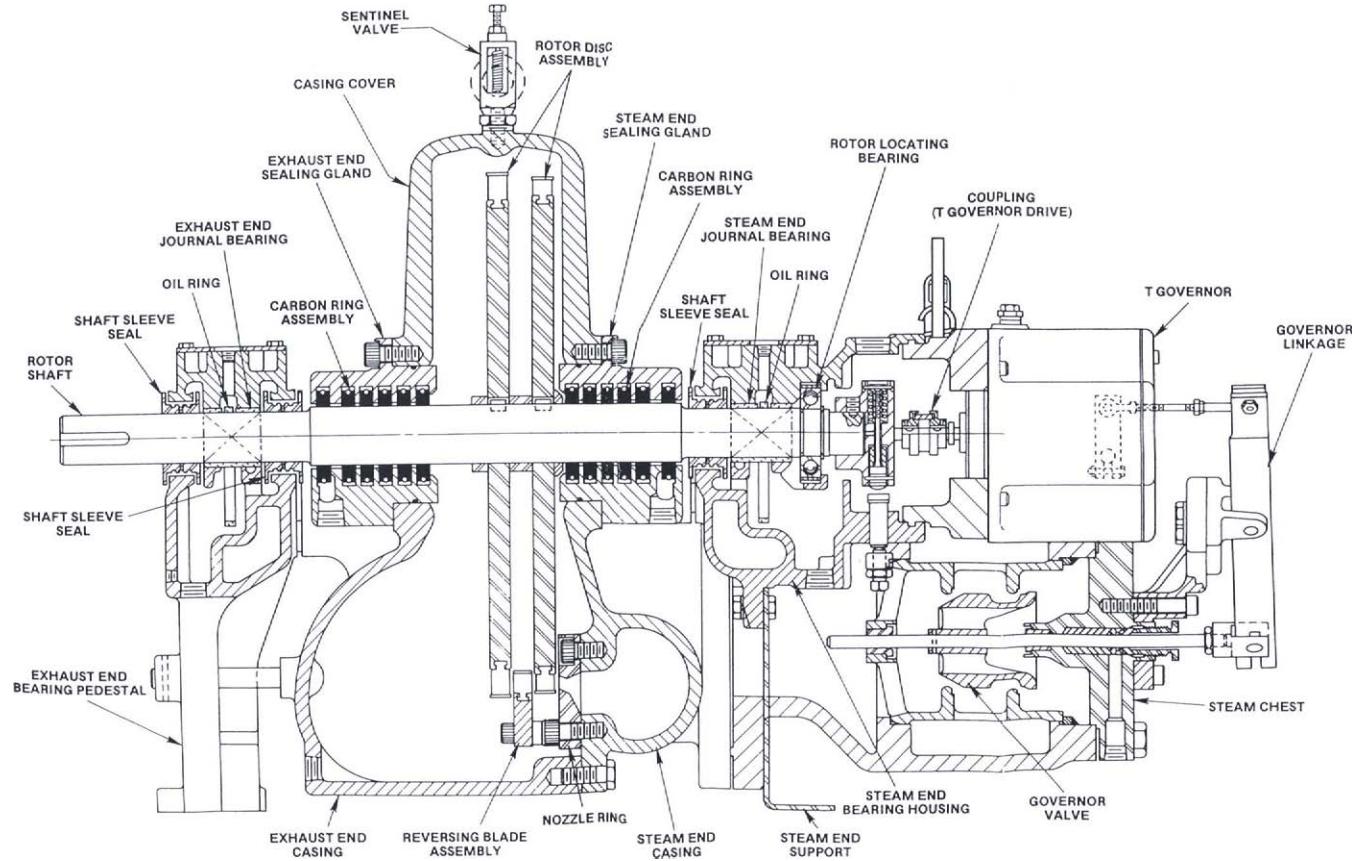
Typical general purpose (pump drive) turbine assembly (Courtesy of the Elliott Company)
